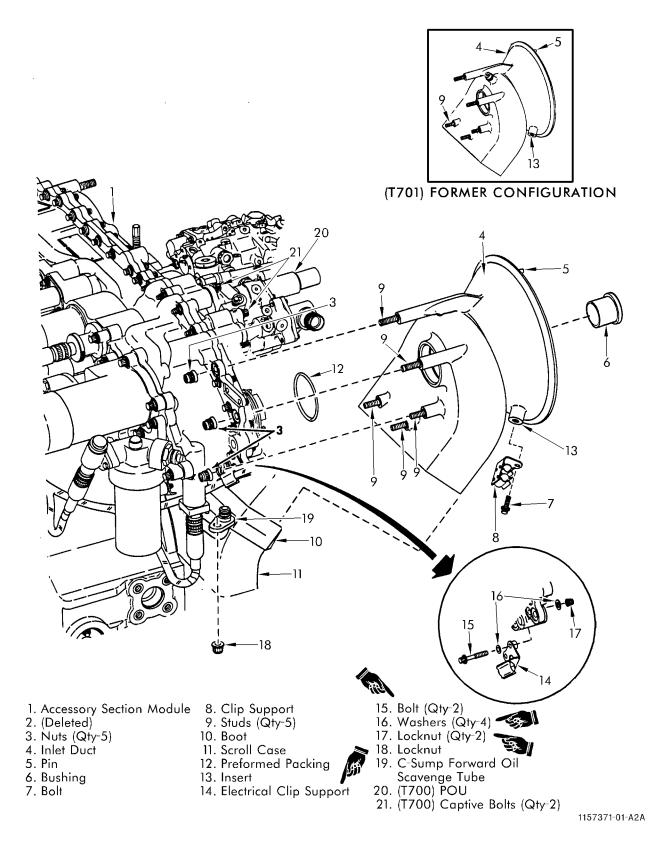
(T700, T701) Particle Separator Inlet Duct; Removal, Inspection and Installation
